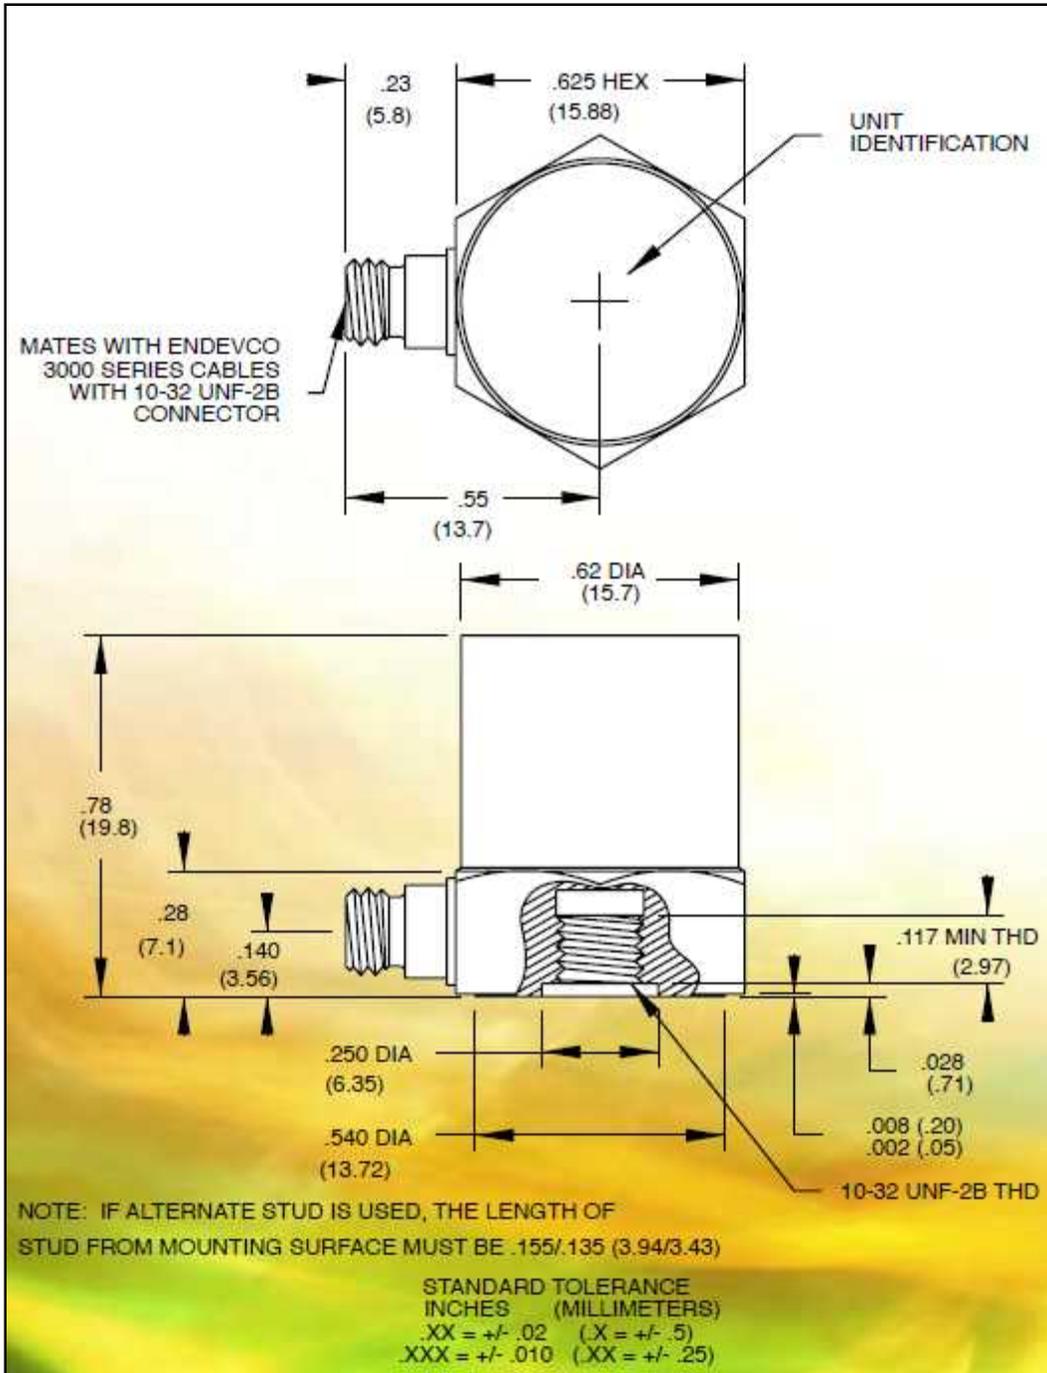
Endevco Model 2272 Piezoelectric Accelerometer Dimensional Drawing
